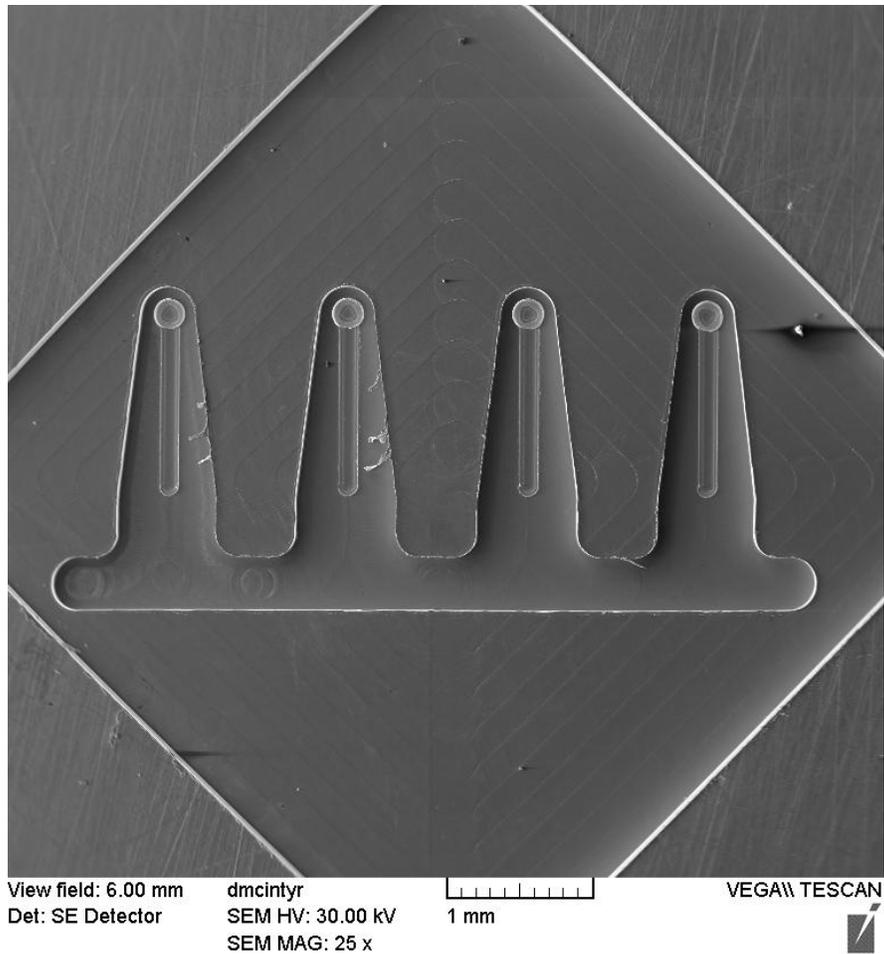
SEM image of the mold design that was machined into a stainless steel
